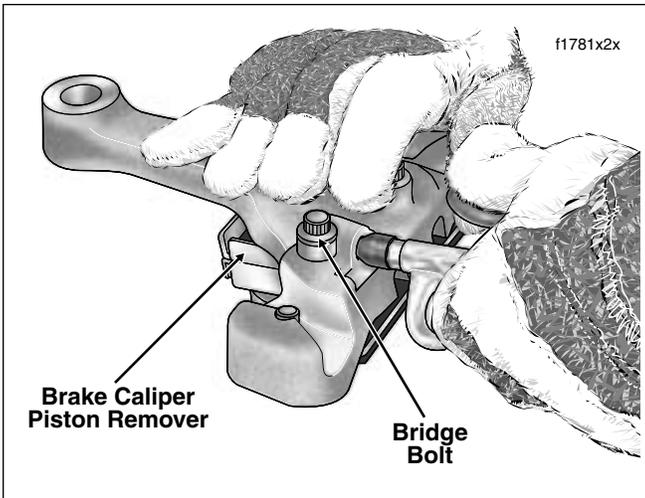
Direct Compressed Air Into Banjo Bolt Hole
